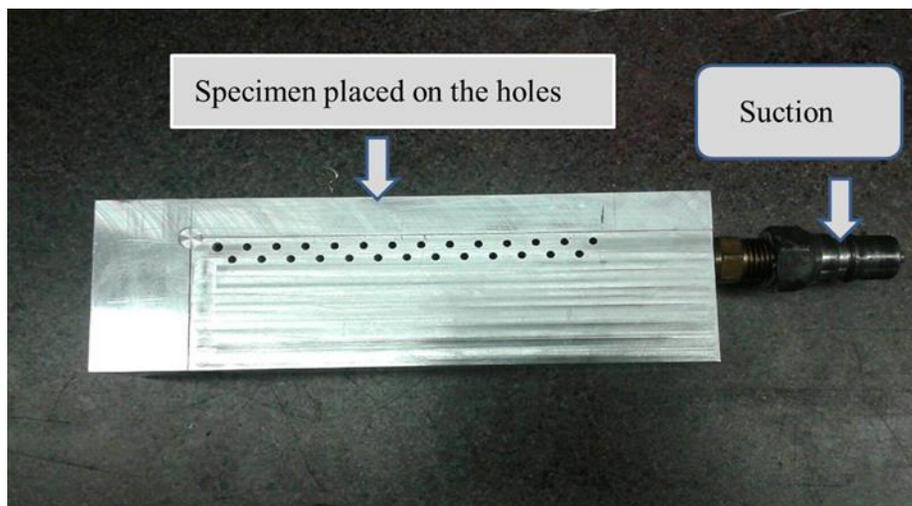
PNEUMATIC FIXTURE FOR LAYER REMOVAL
